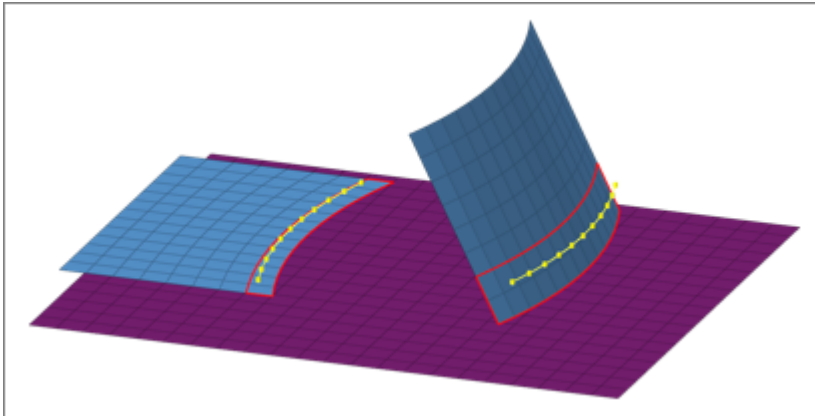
Original Model before Realization Initial situation with one element row marked for the lap weld and two element rows for the t weld.
